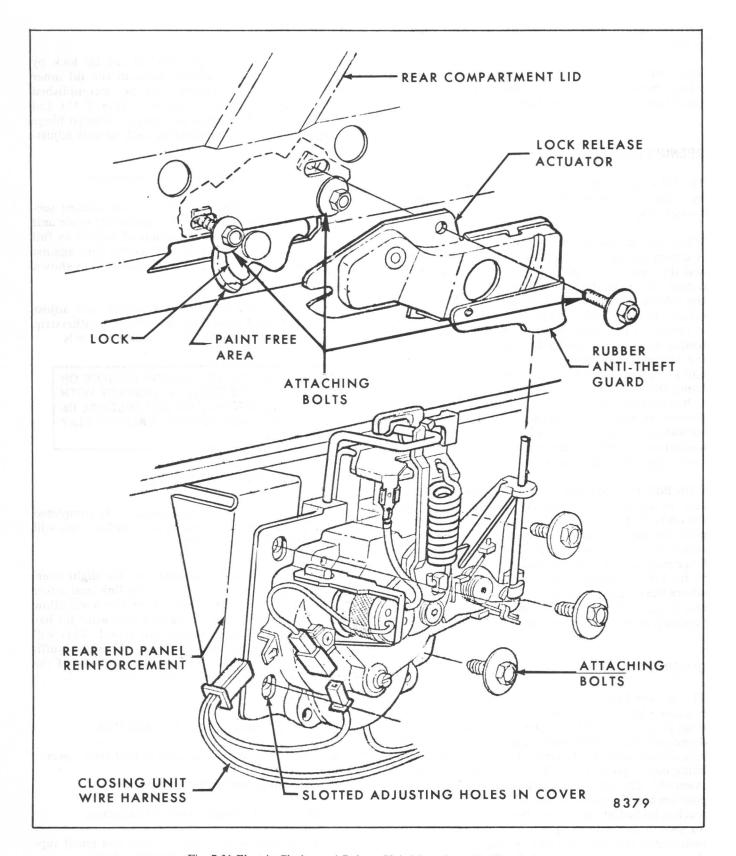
Electric Closing and Release Unit Mounting - Cadillac Styles
